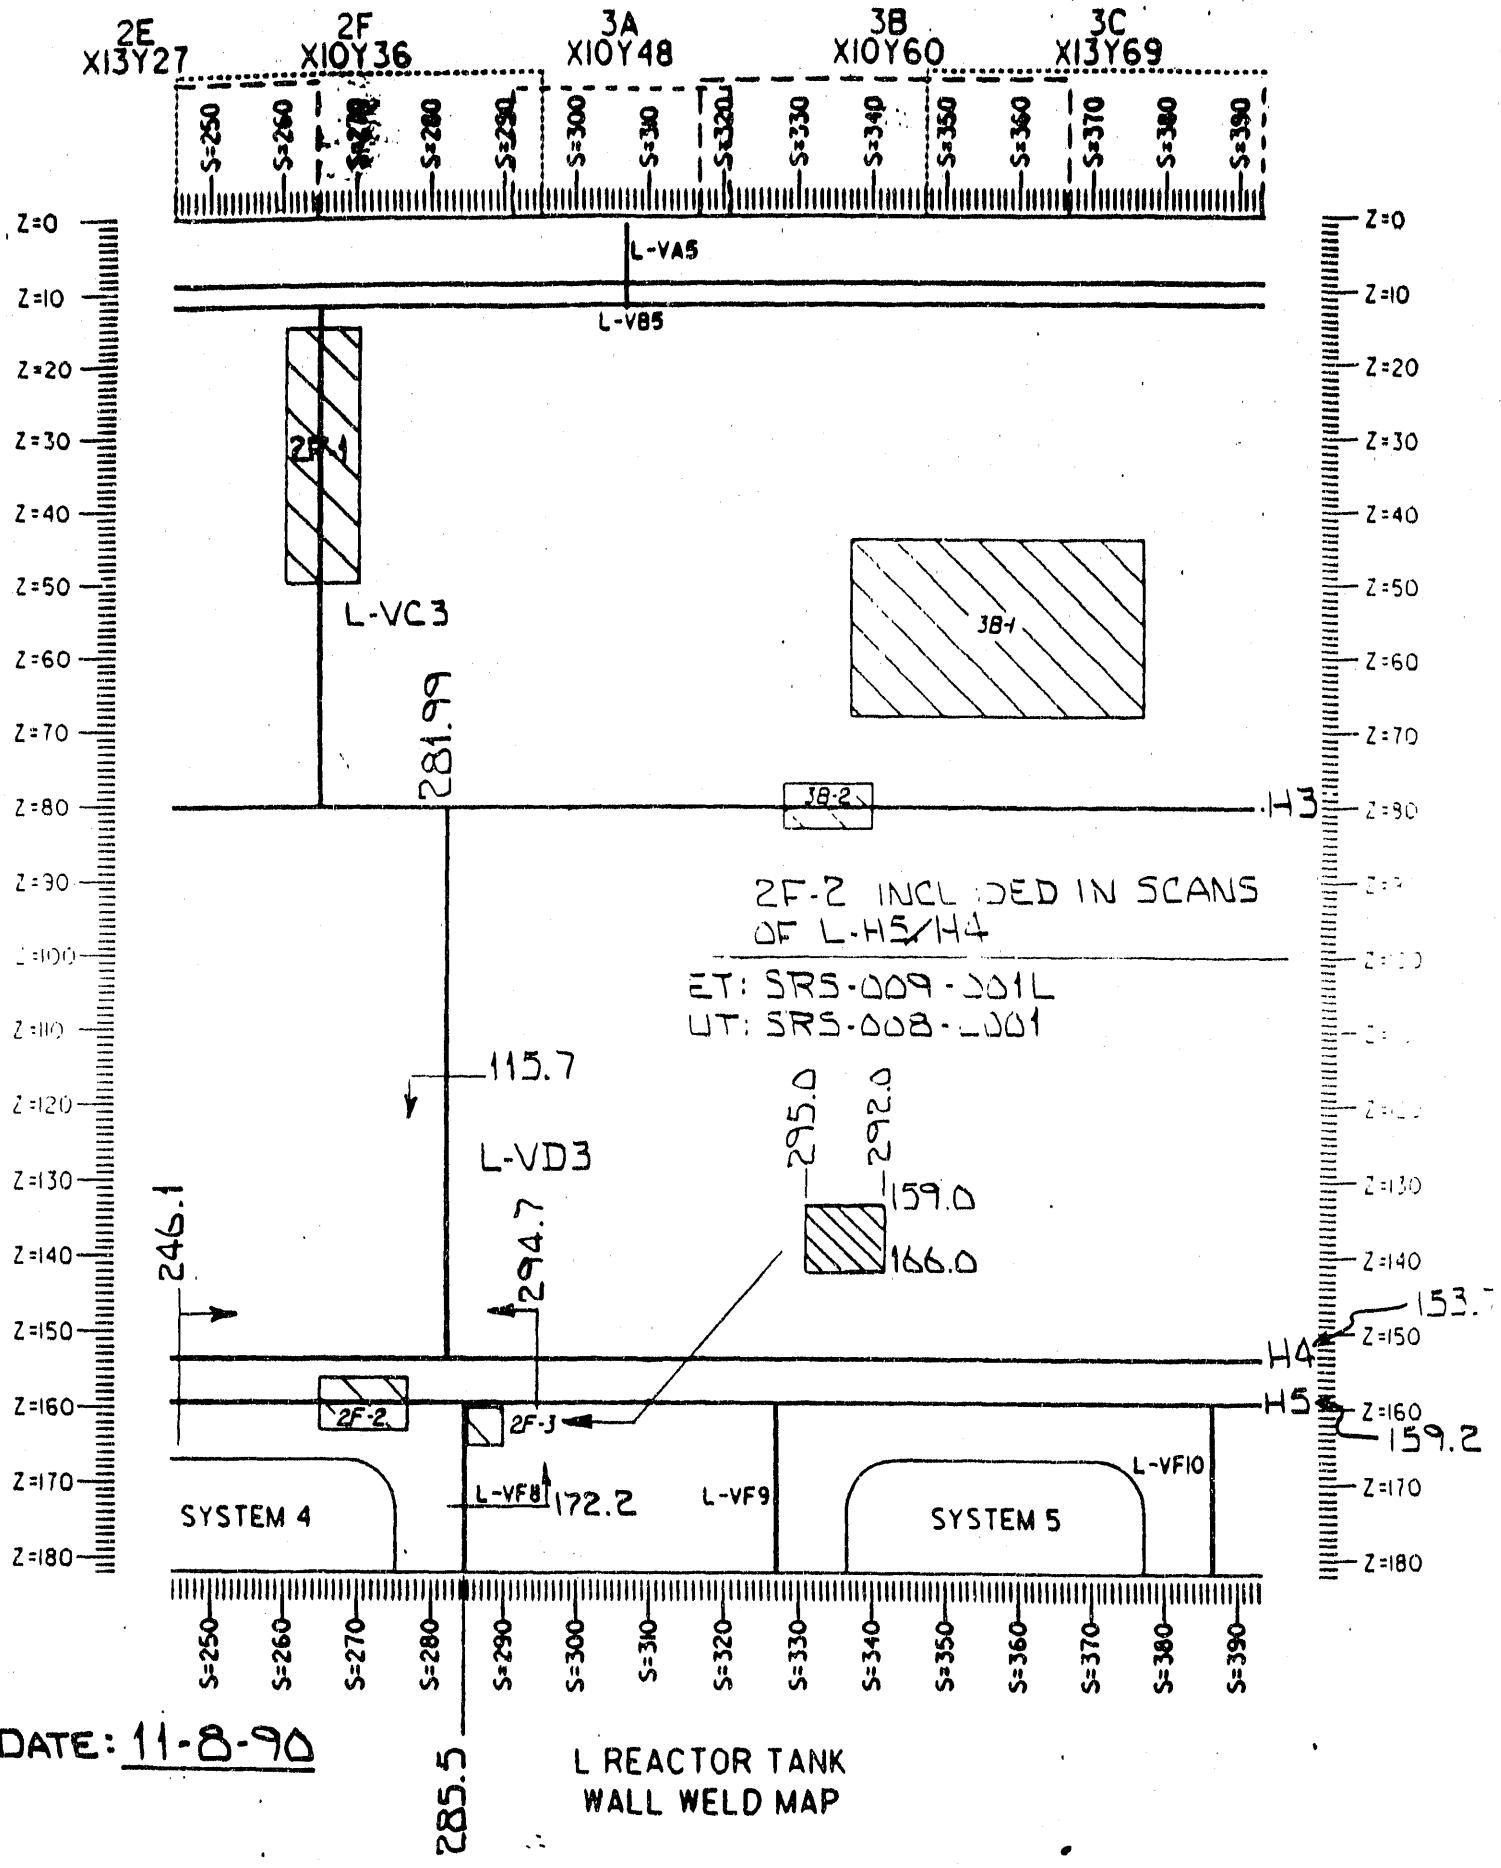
DAMAGE AREA AT THE BOTTOM TANK GIRTH WELD
